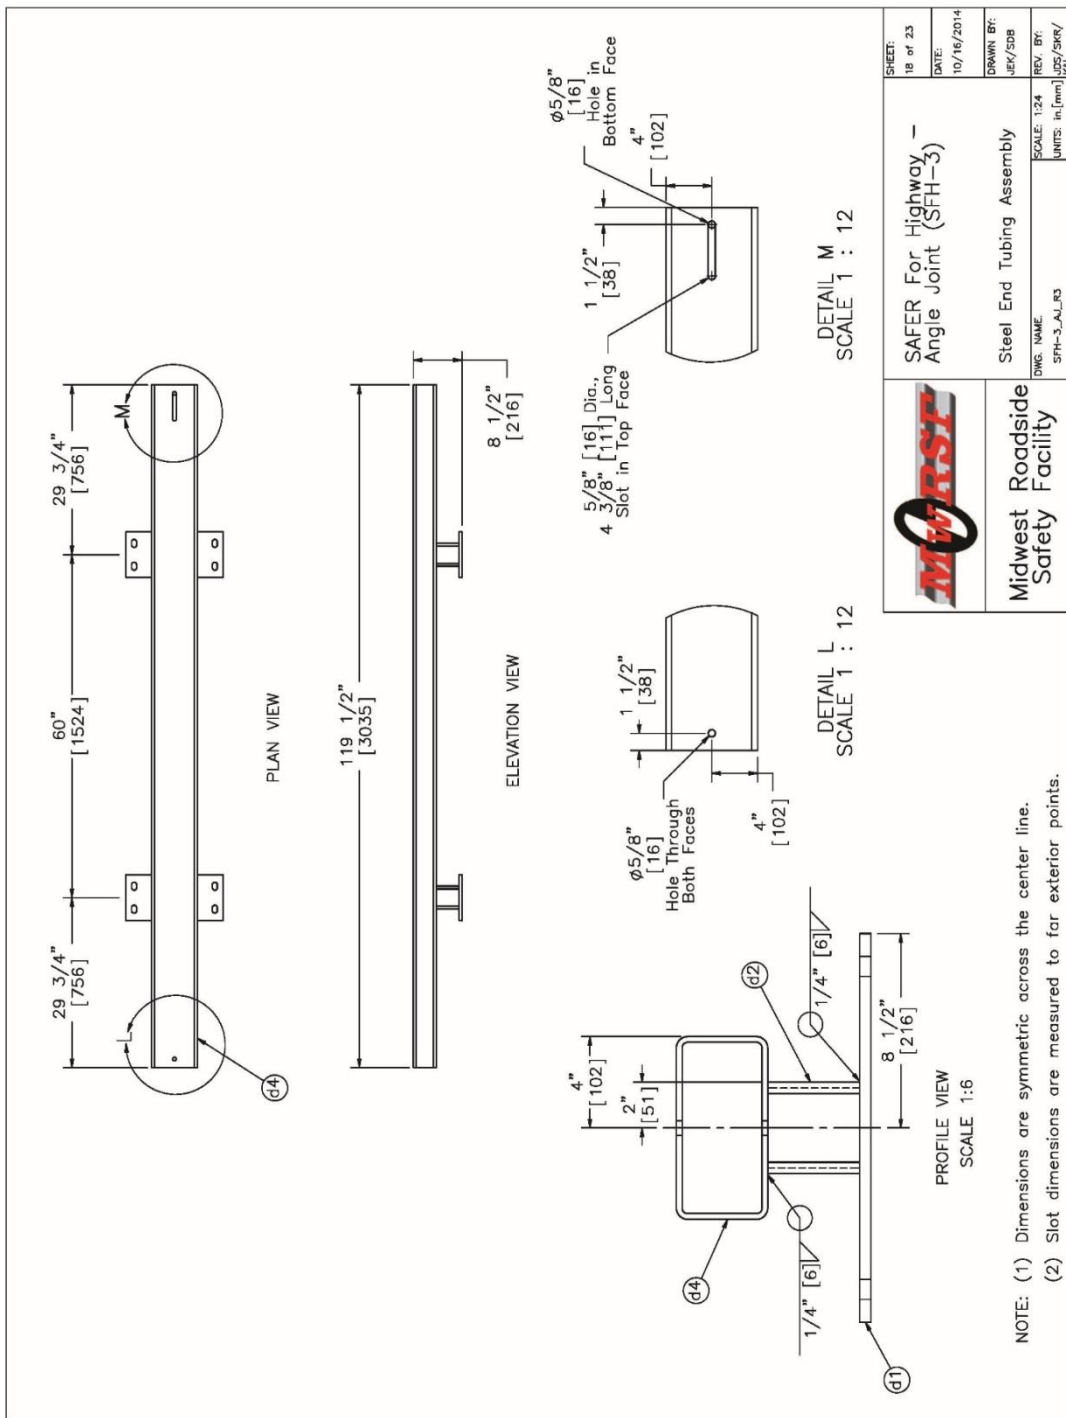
Steel End Tubing Assembly, RESTORE Barrier [20]
